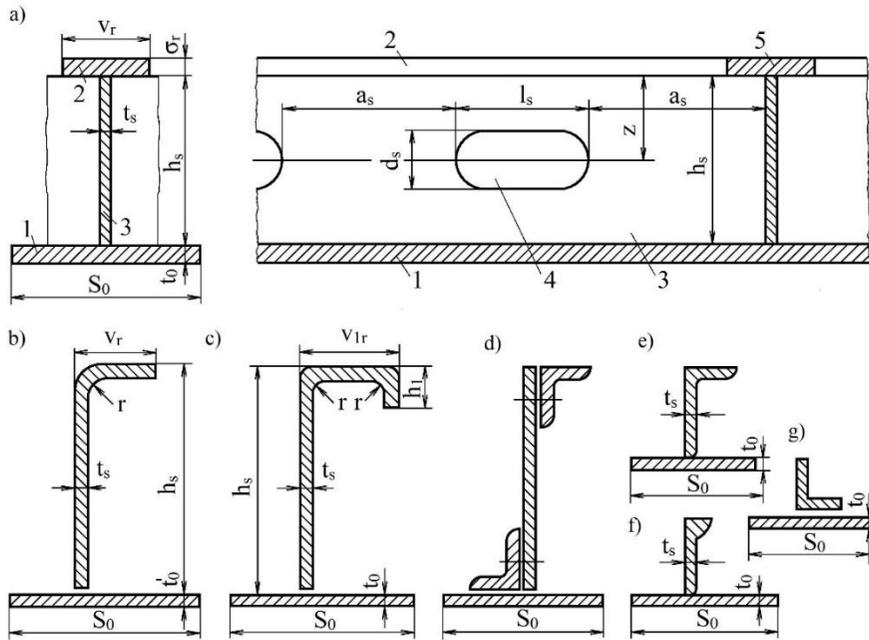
Transverse Sections of Frame and Standard Girders (Stiffenings) [Authors, 4]
